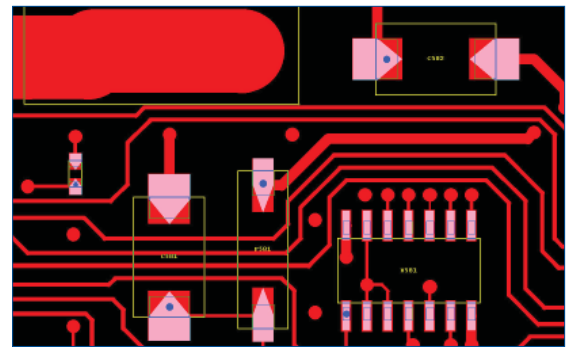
This complex solder stencil design includes a VPL package with lead contact area. Solder design should include the use of home plates and possible a dog bone.
